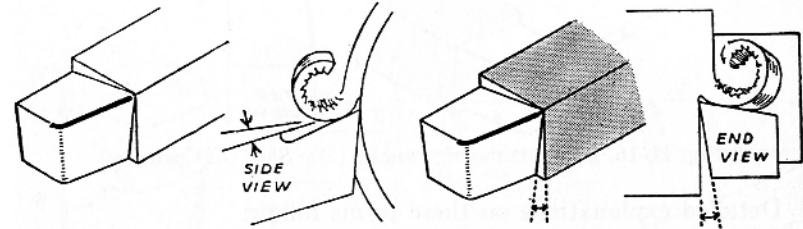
Back rake angle. (The Shell Oil Company)
